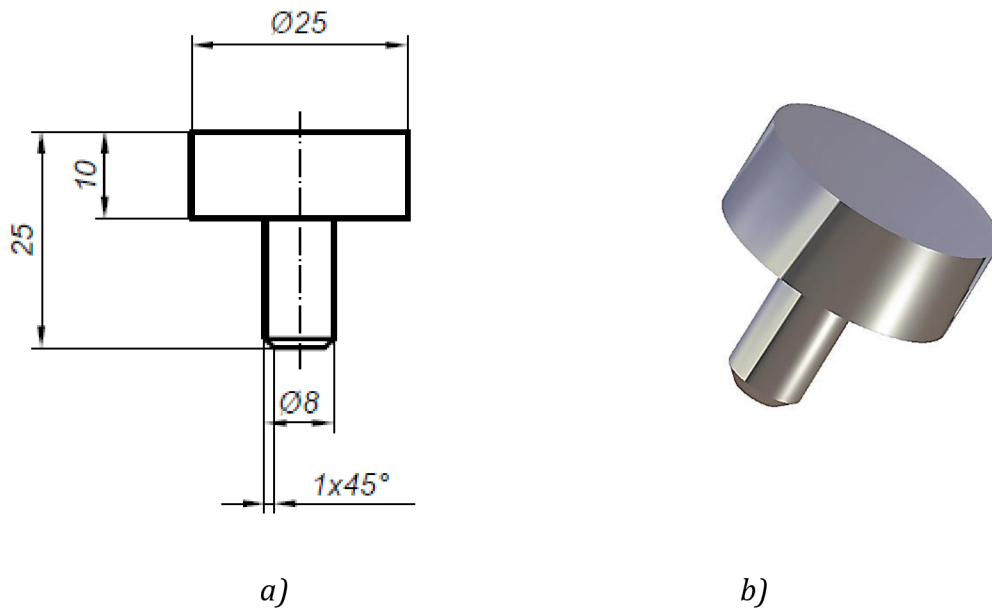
Sample, a) sketch with dimensions, b) 3D model
